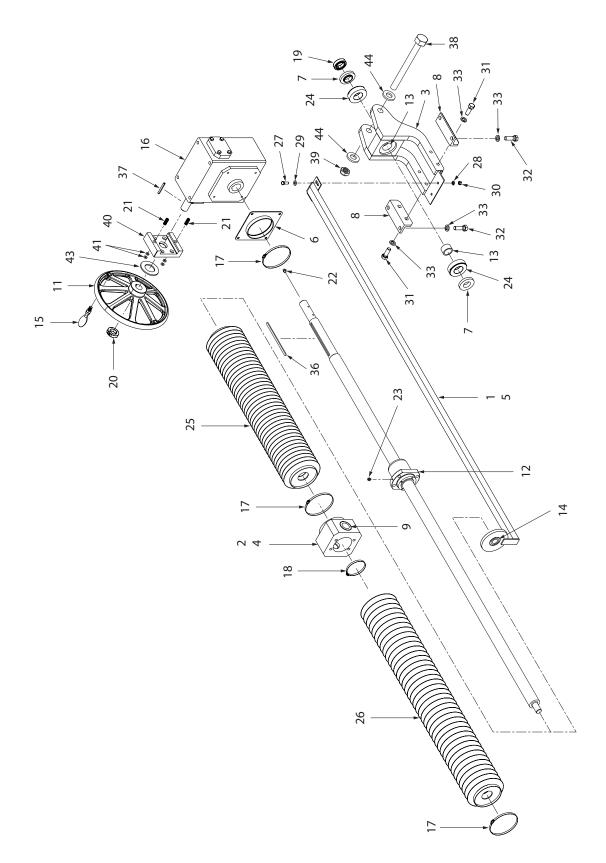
AGSE-E16626-S01 Cradle Jack Assembly
